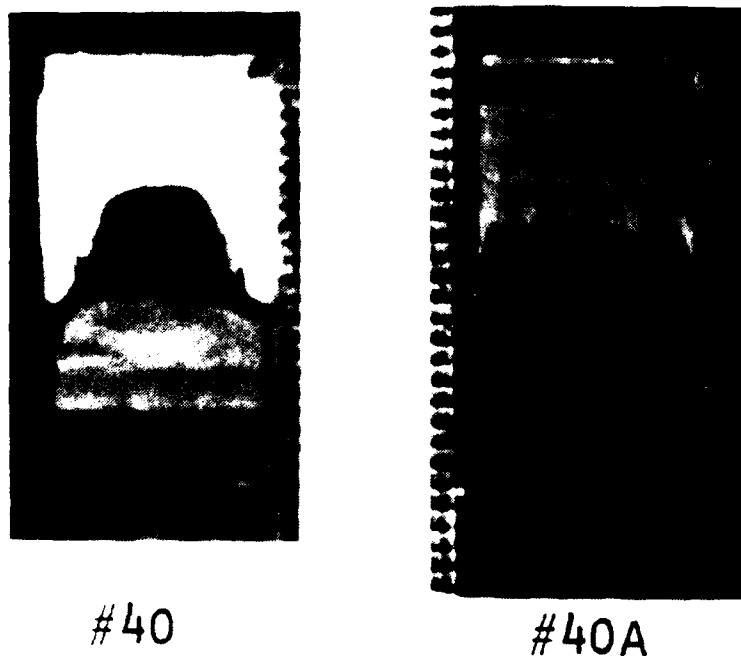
Heat-tinted fracture surfaces of two bend specimens.
